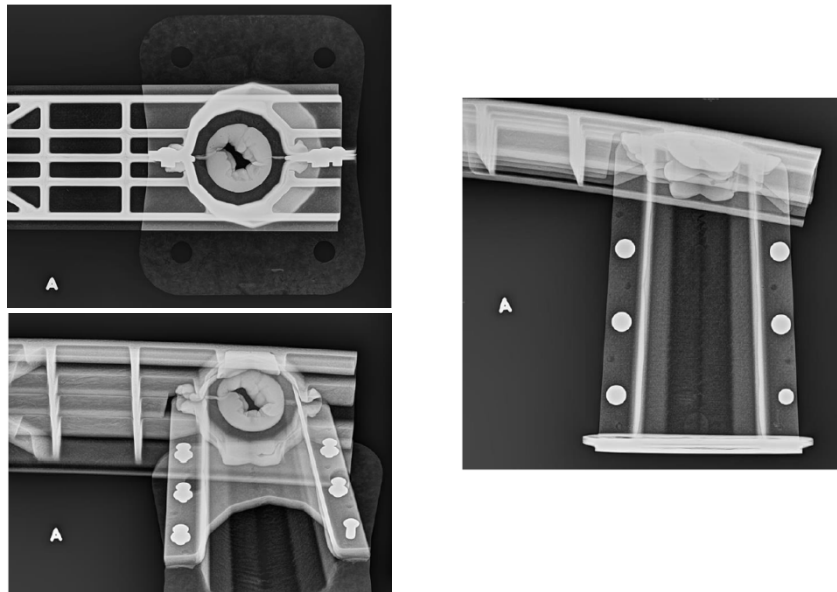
Radiographs of FB-CC assembly. There are three views of the same assembly. a) end view, b) side view, and off-axis view. The spread of the adhesive between the FB and CC can be seen. The adhesive completely fills the CC side flanges.
